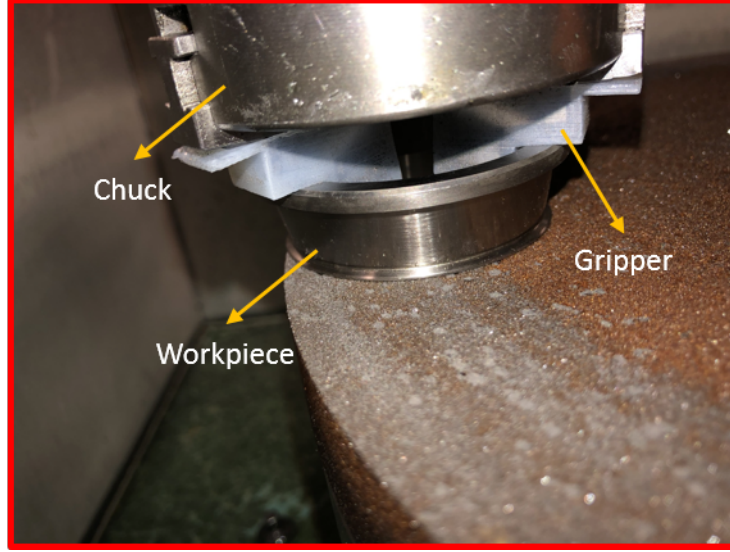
Flexible gripper with bearing ring face in contact with the grinding wheel.
